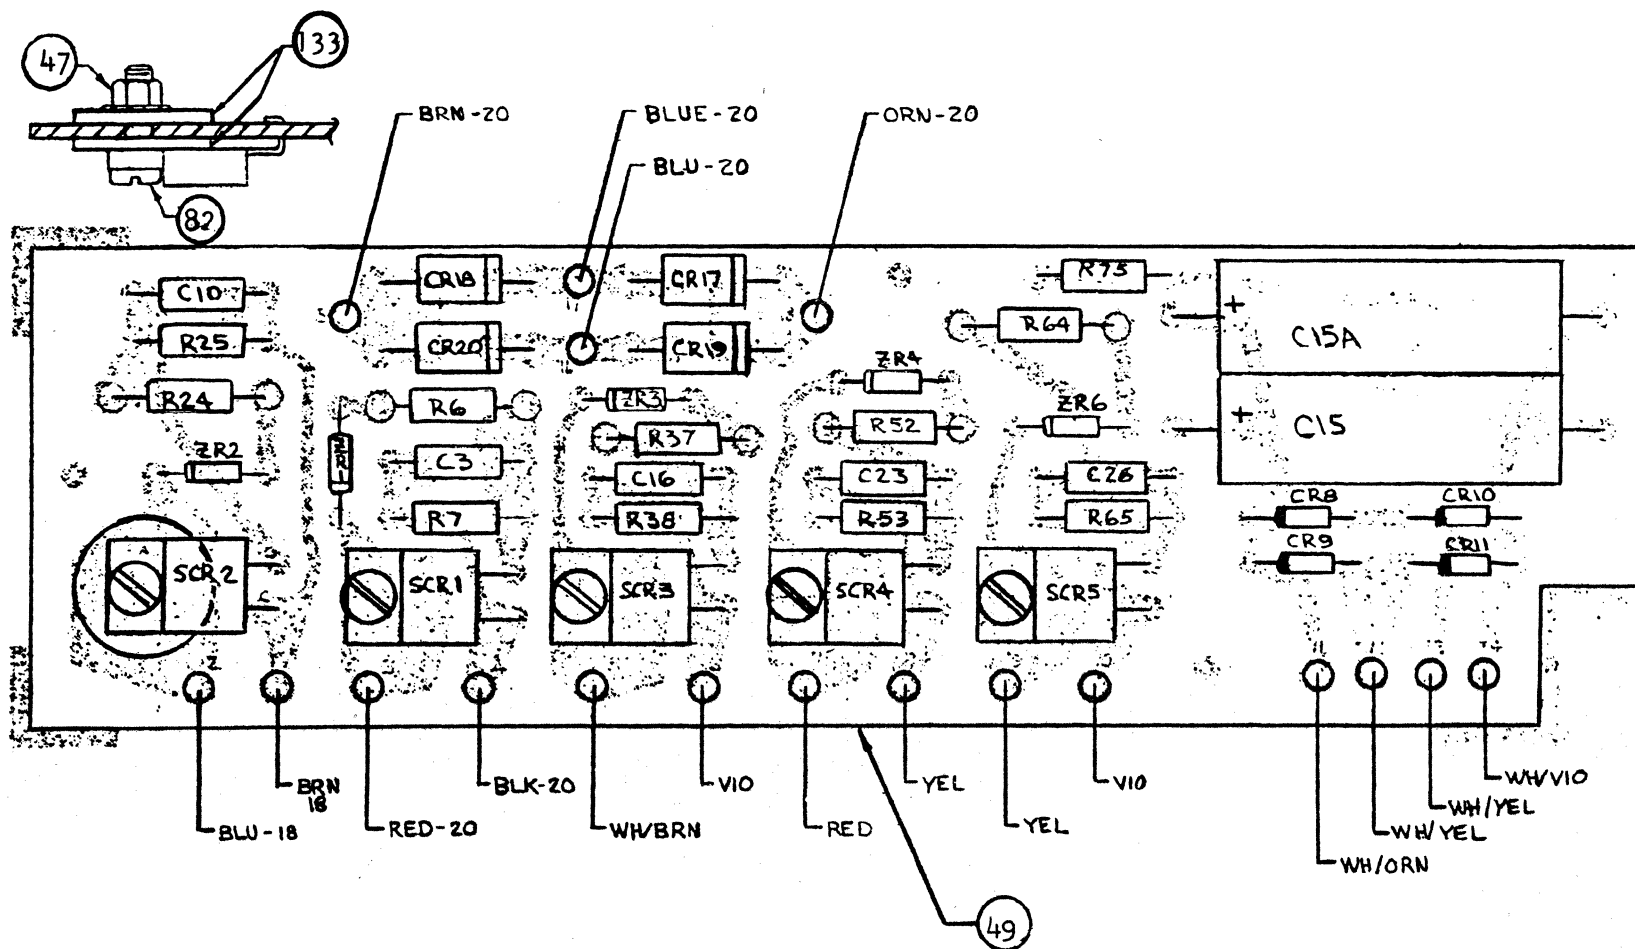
P.C. BOARD ASSEMBLY #1 (SHEET 6 OF 6)
